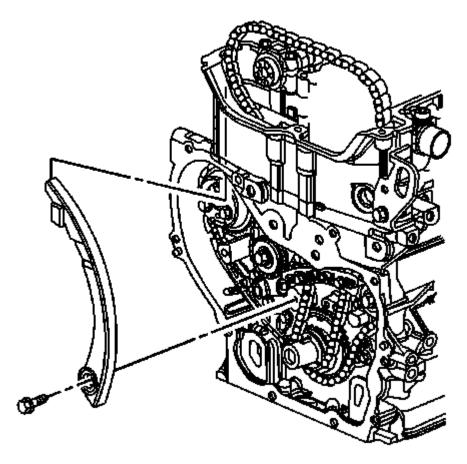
Timing Chain Tensioner Guide Courtesy of GENERAL MOTORS COMPANY
